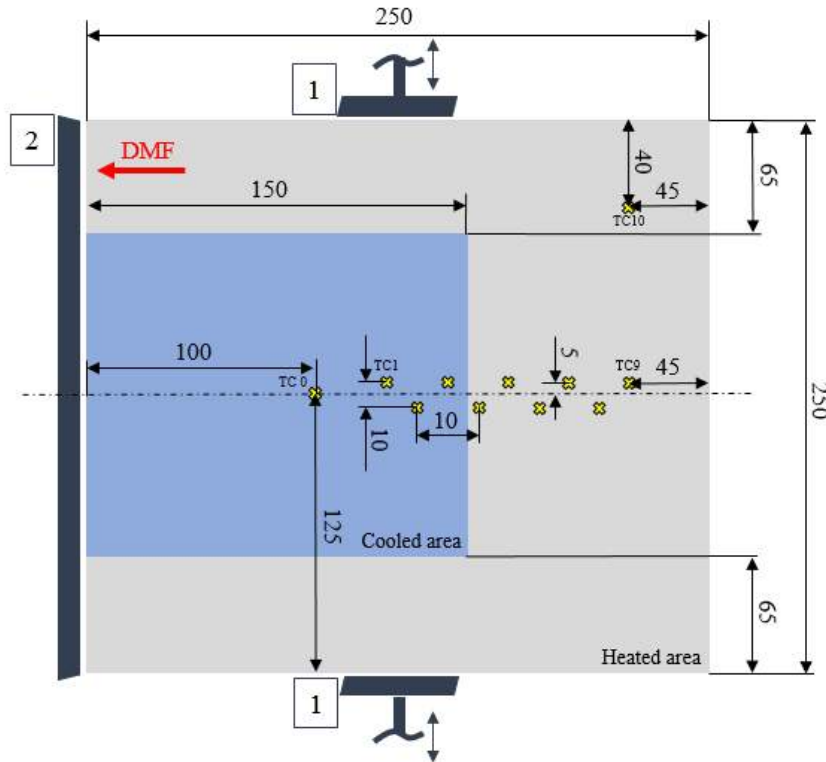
Thermocouples covering the hot and pre-cooled zones of the blank
